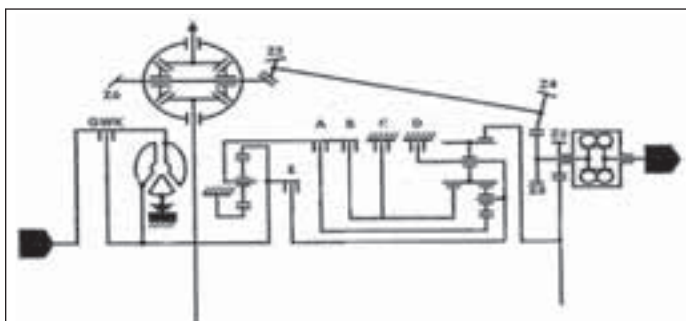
Schematic view of drive train of six-speed automatic gearbox 6HP32.
